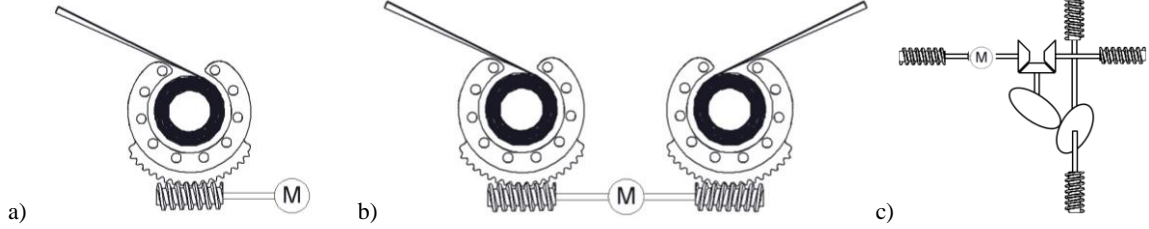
a) one motor per cage; b) one motor per pair of cages; and c) a single motor for all four cages.
